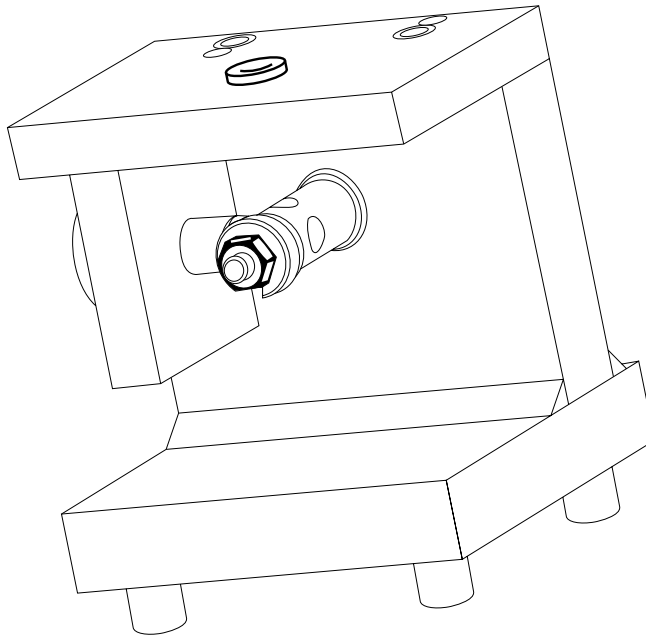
Jig plate added to the jig base for the part shown in Fig. 15.48
